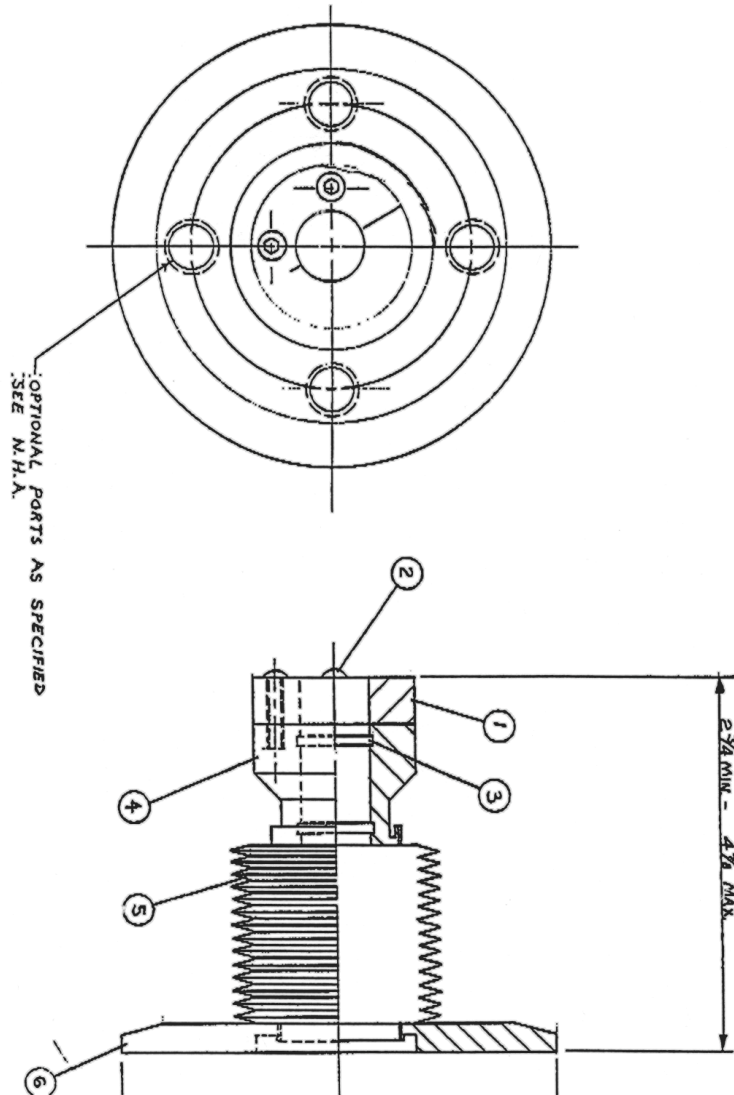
Schematic of optional port openings [67]. The ports are used for drawing of thermocouple lines for measurement of sample temperature. These ports are later plugged for controlled gas environment testing.
